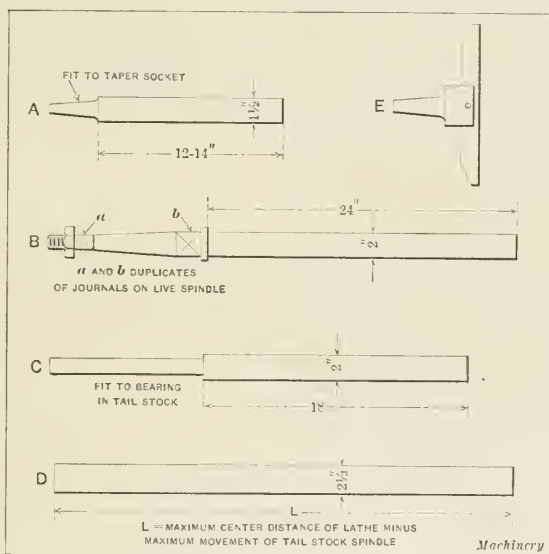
Different Forms of Test Bars used in making Alignment Tests on Lathes
